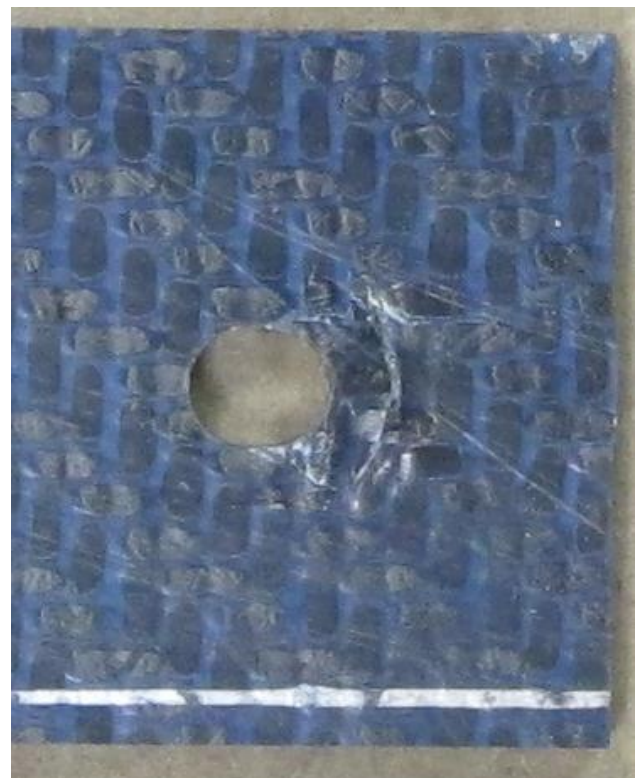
Typical bearing specimen failure for B1I/S1I result, 0 deg specimen shown
